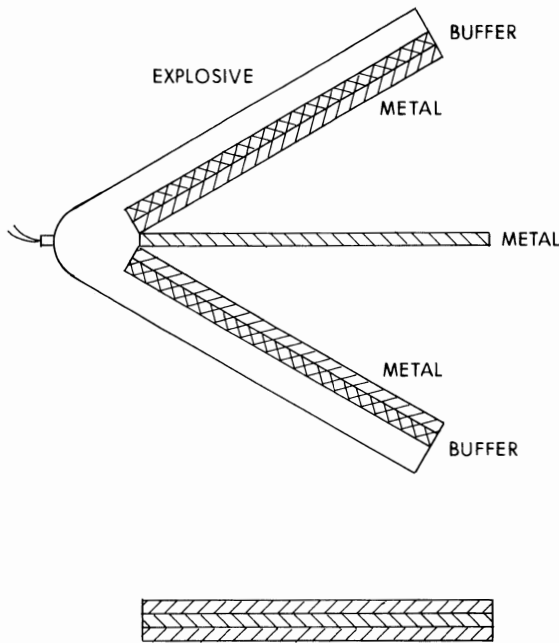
Explosive welding, a three-layer weld (sandwich) (Rinehart and Pearson 1963).
